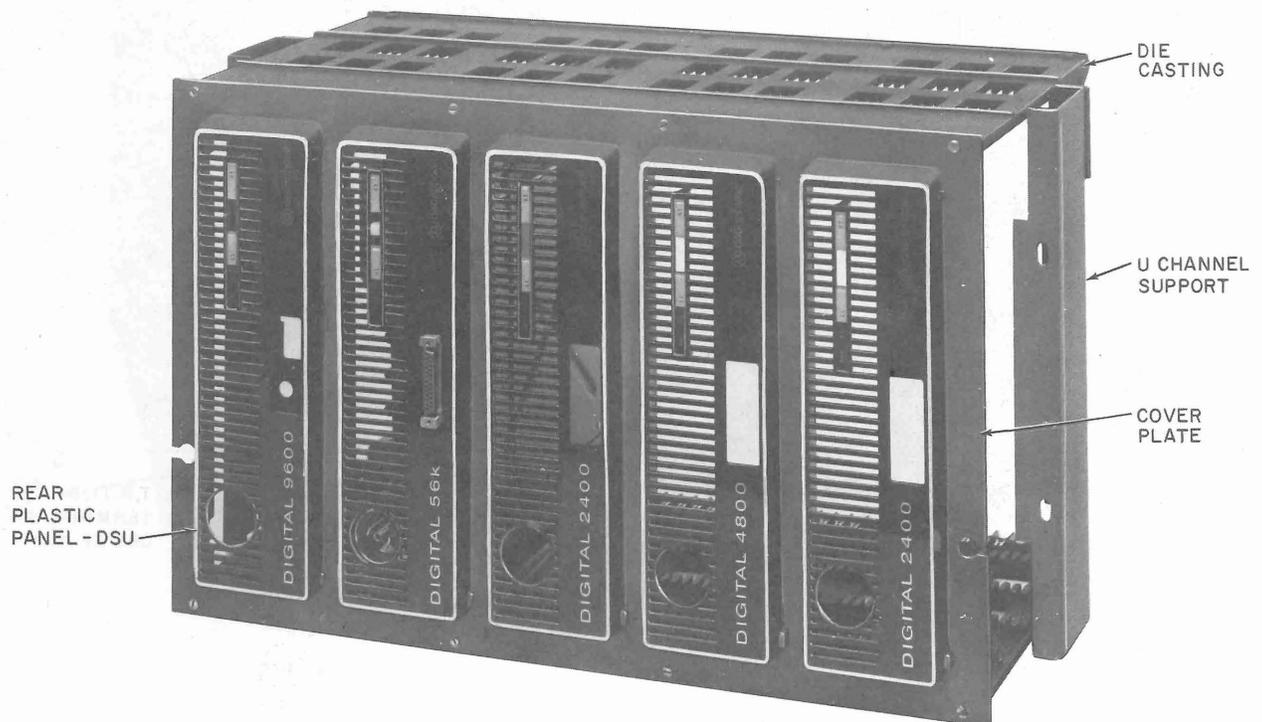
48A-Type Data Mounting Showing Cover Plate with Five 500A Rear Panels
